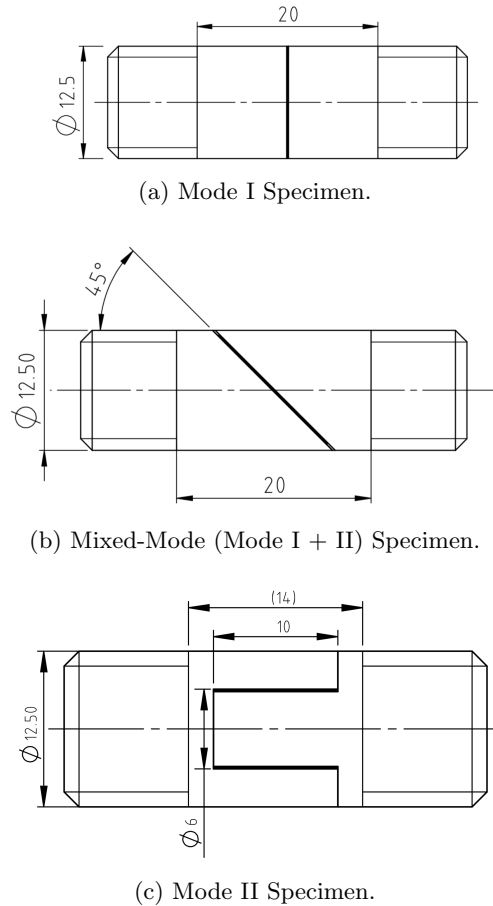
Designed Bonded Joint Specimen (BJS).
